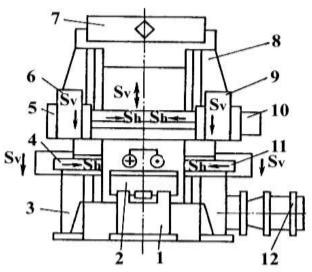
Block diagram of a planer: 1 – body; 2 - table; 3, 8 – colomns; 4, 6, 9,11 - tool-heads; 5, 10 – traverses; 12 – drive
